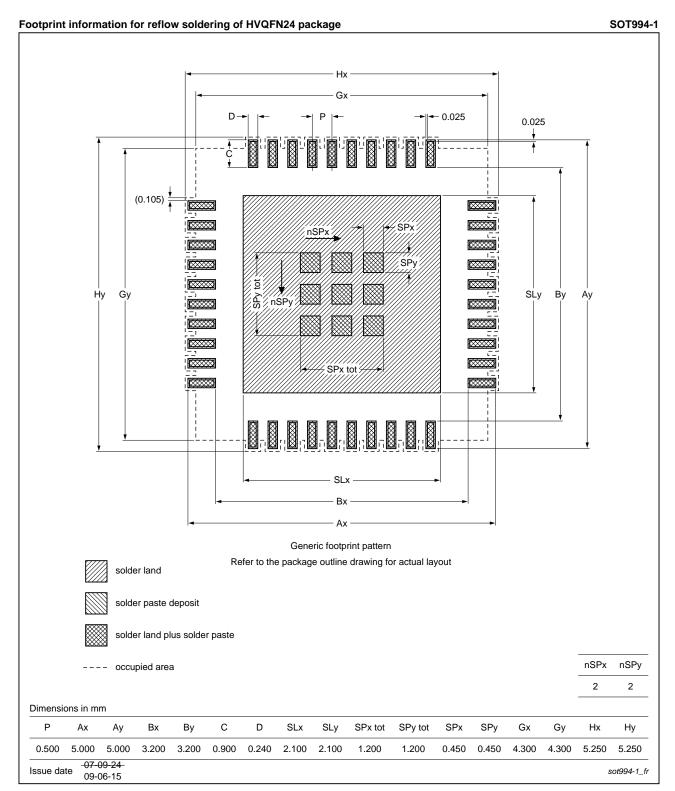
PCB footprint for SOT994-1 (HWQFN24); reflow soldering
